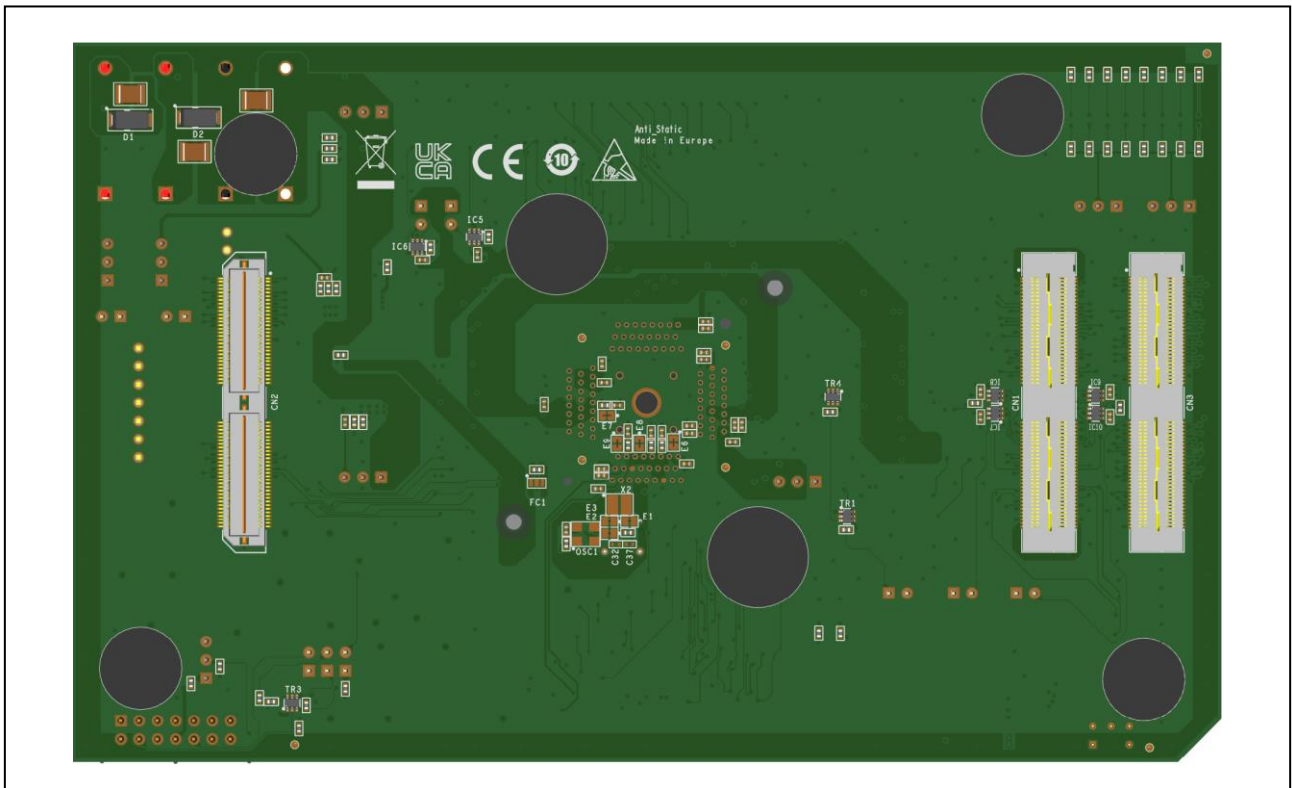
Piggyback board bottom view of board version D020647_06_V02
